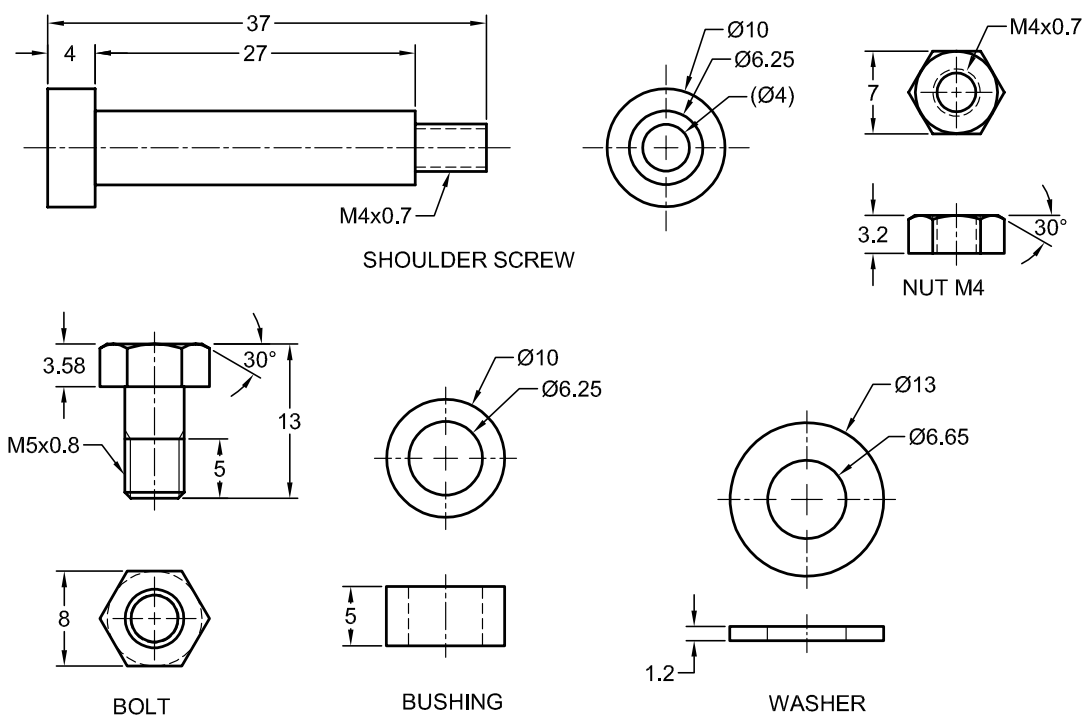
Dimensions of the Shoulder Screw, Bolt, Nut, Bushing, and Washer
